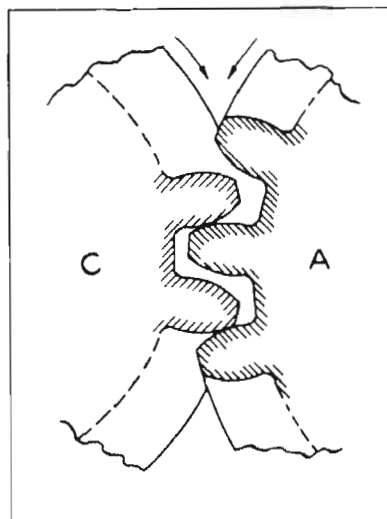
When gear *A* rotates counterclockwise, the tooth-flank contact with gear *C* is as shown.
